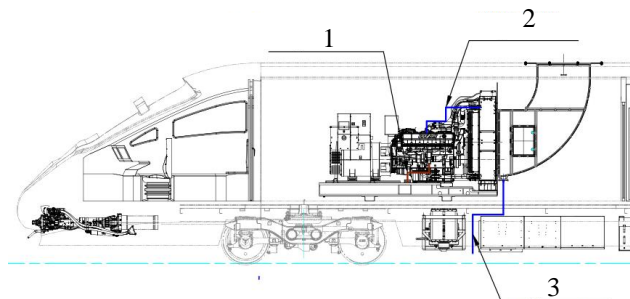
Fuel Piping Diagram on Motor Engine Combustion Engine (Side View)
